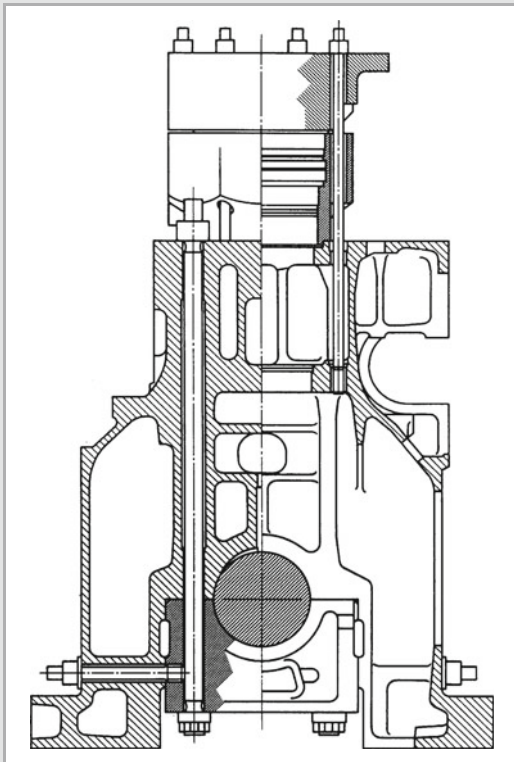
Engine frame with single cylinder jackets, elongated main bearing bolts and elongated cylinder cover bolts (source: MAN Diesel)
